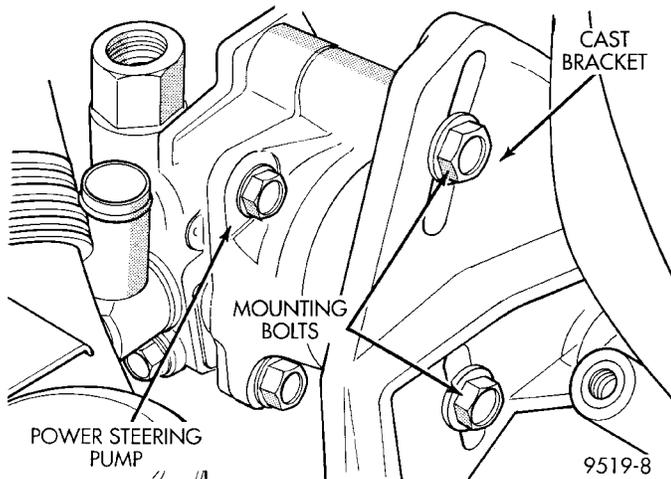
Power Steering Pump Mounting Bolts (Rear)
